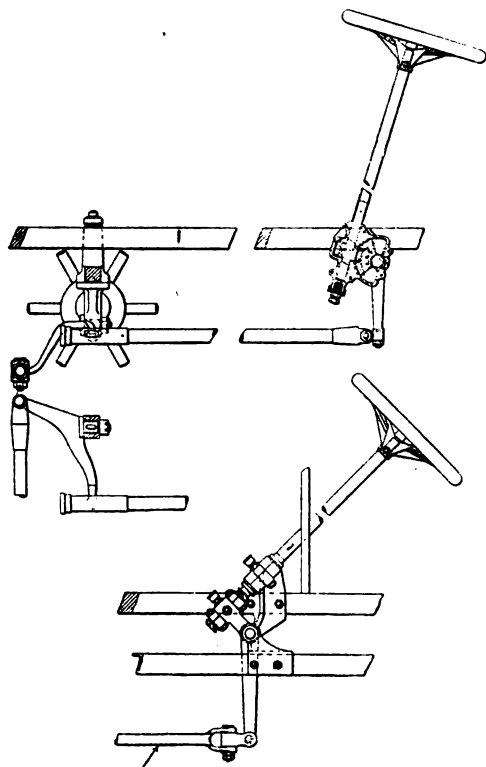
Steering Gears (Daimler). Worm and wheel sections.
